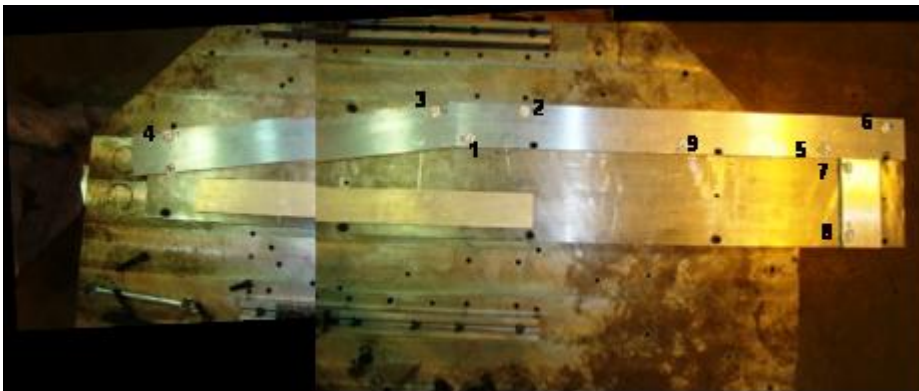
The Subtended Article After Tack Welding and in Position for Welding Weld 1 of Layer 1.
